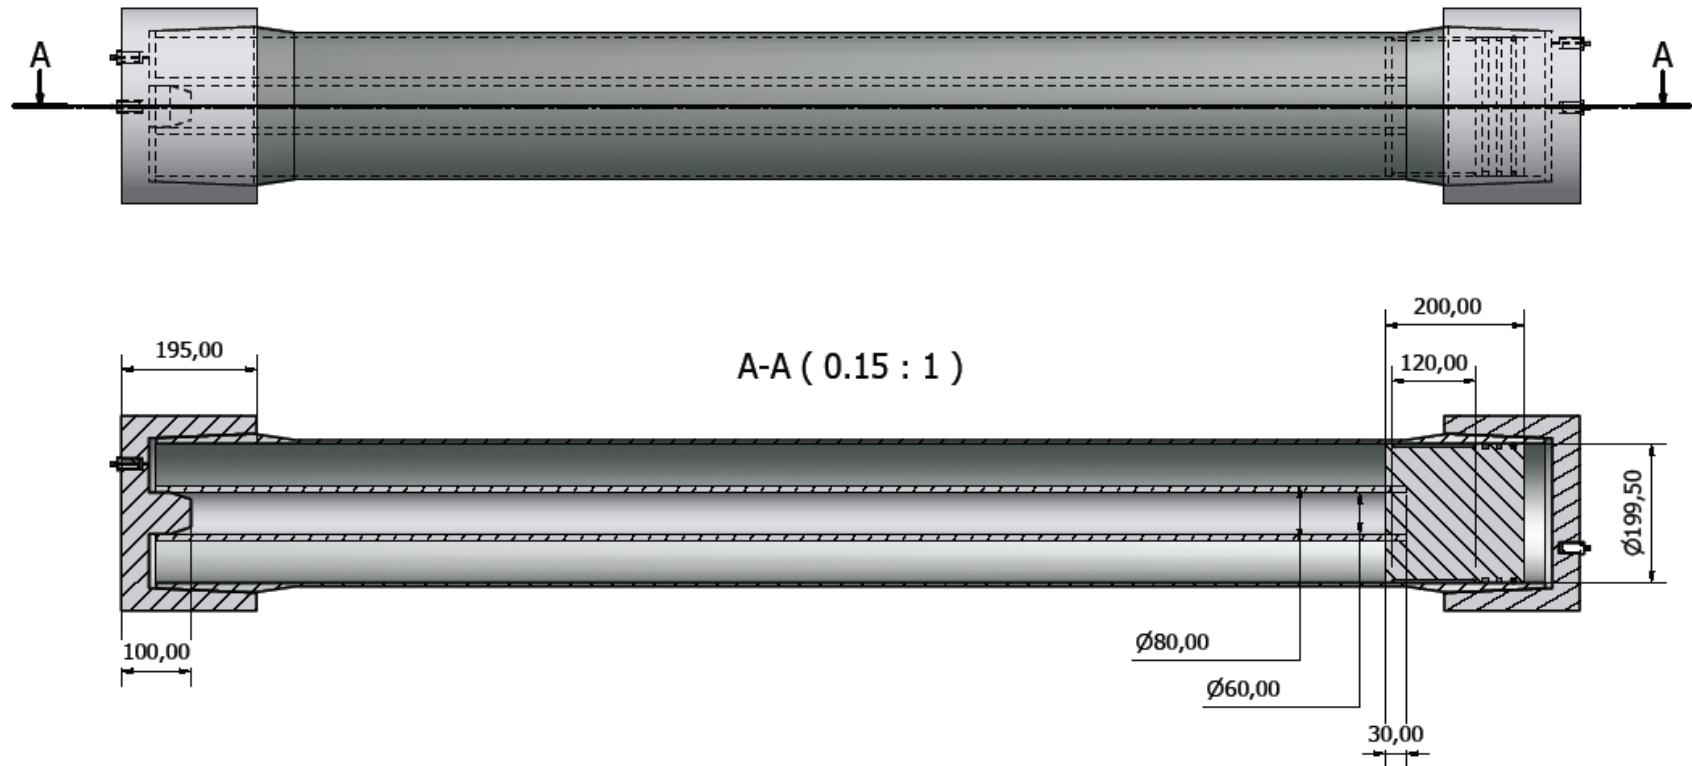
Design of the adhesive bonded end fitting used for UEWS tests at RT and 65°C.
